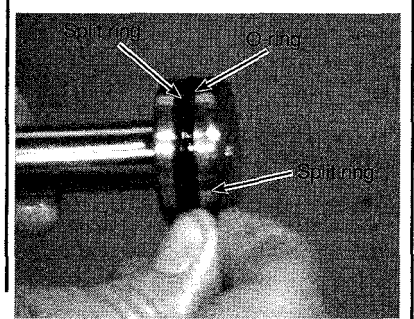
Lubricate a new O-ring and two split rings, then install onto the piston
